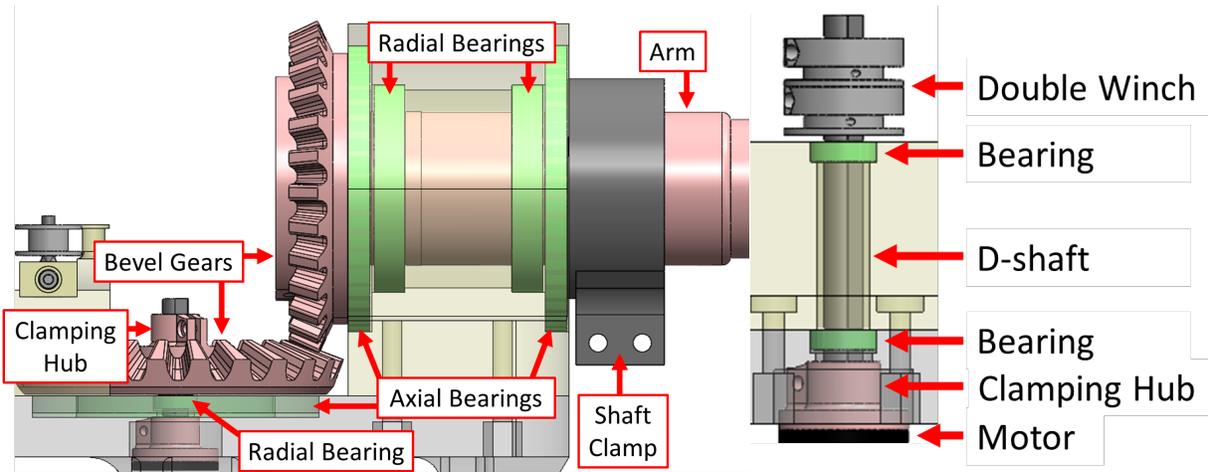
Side views of shoulder (left) and driving shafts (right)
